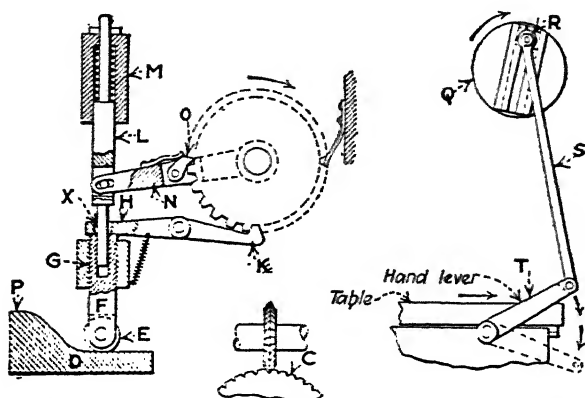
Automatic Indexing Device for Hand Milling Machine
